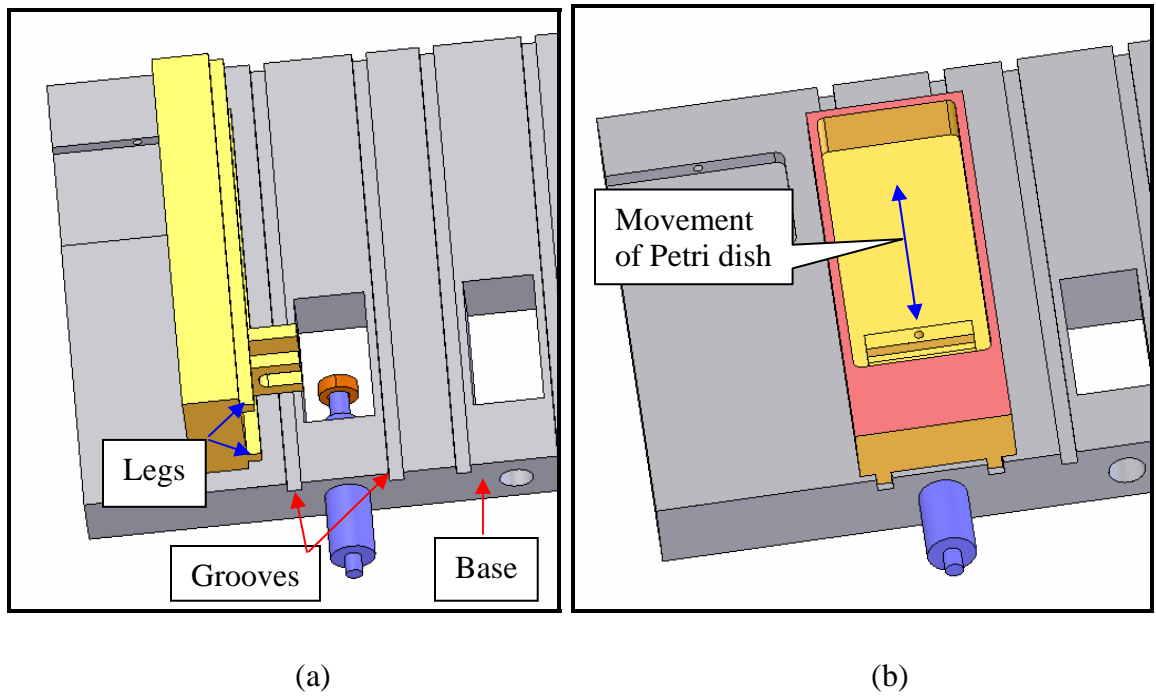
Petri dish-base assembly; (a) before assembly (b) after assembly
